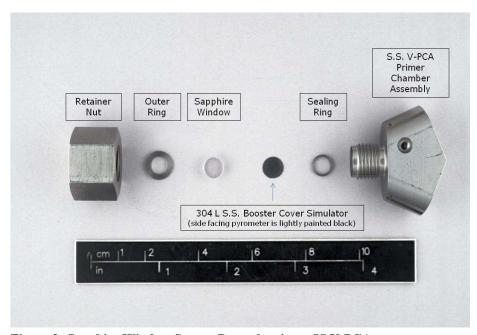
Sapphire Window System Parts showing a SS V-PCA.
